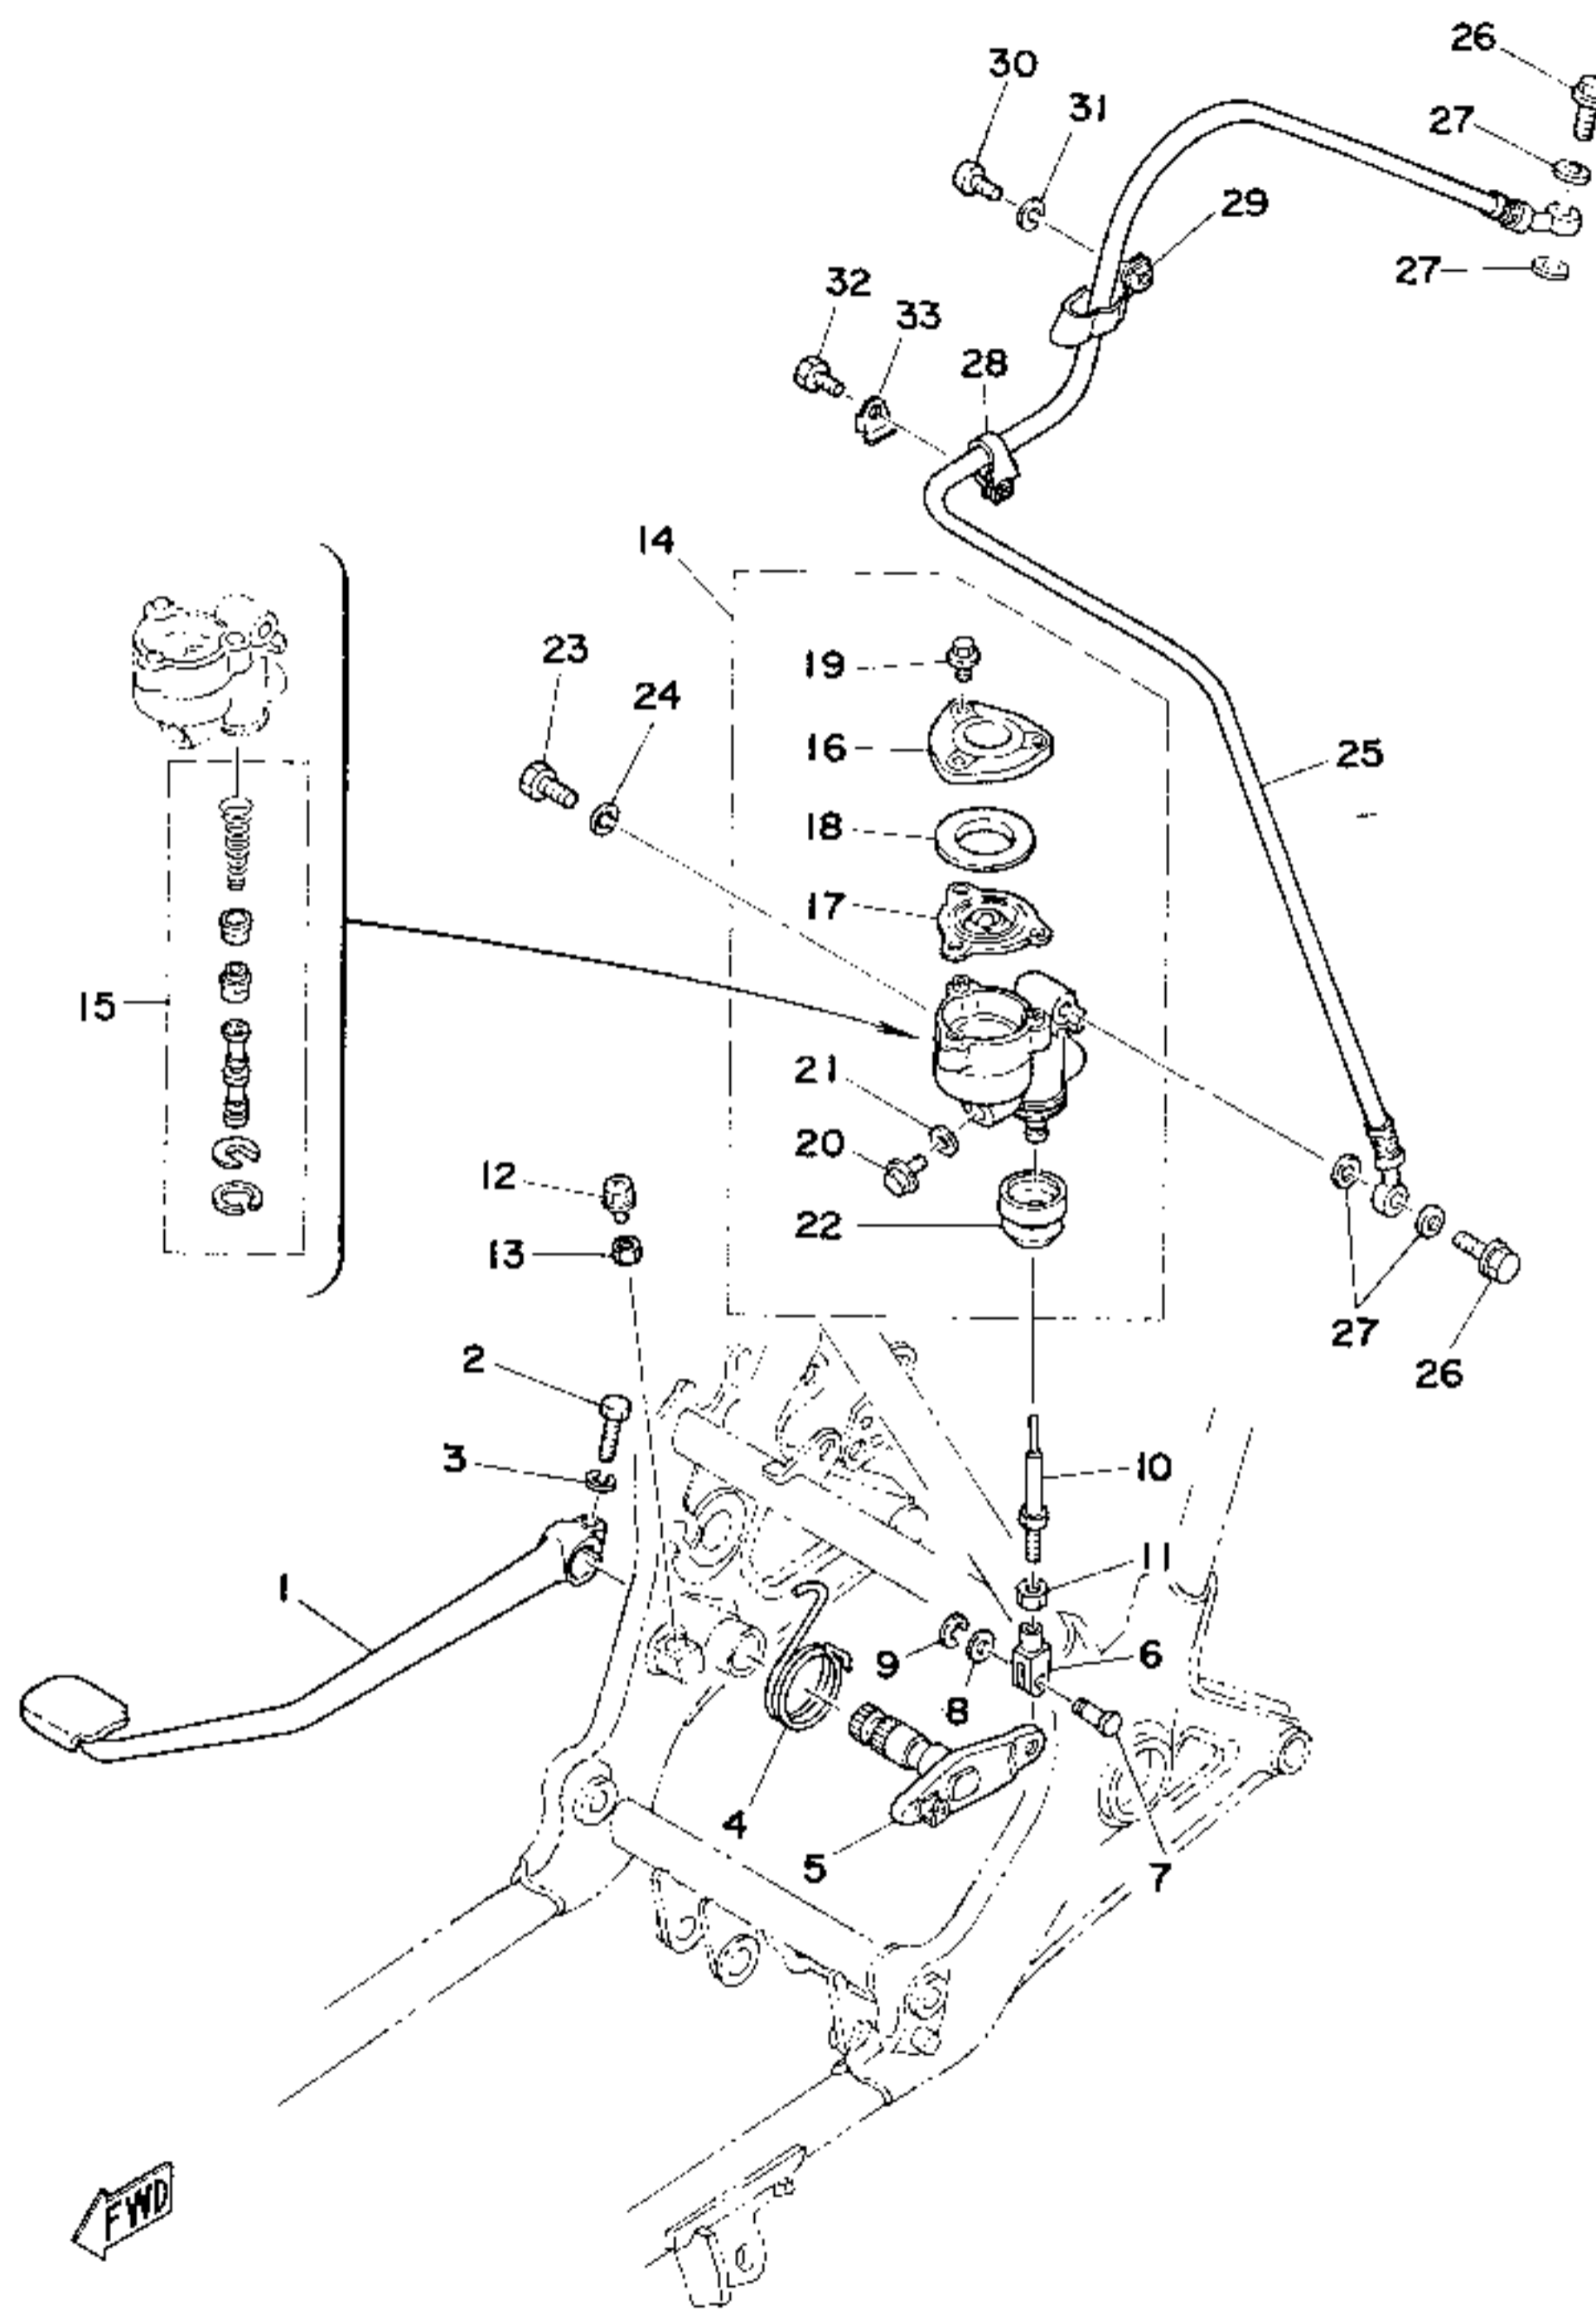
BRAKE PEDAL - REAR MASTER CYLINDER
